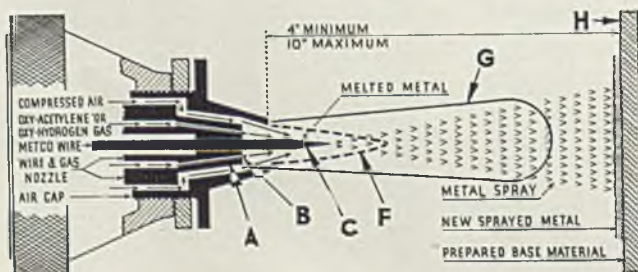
Section through wire nozzle, air cap and flame to show different elements involved in operation of metal spray gun
